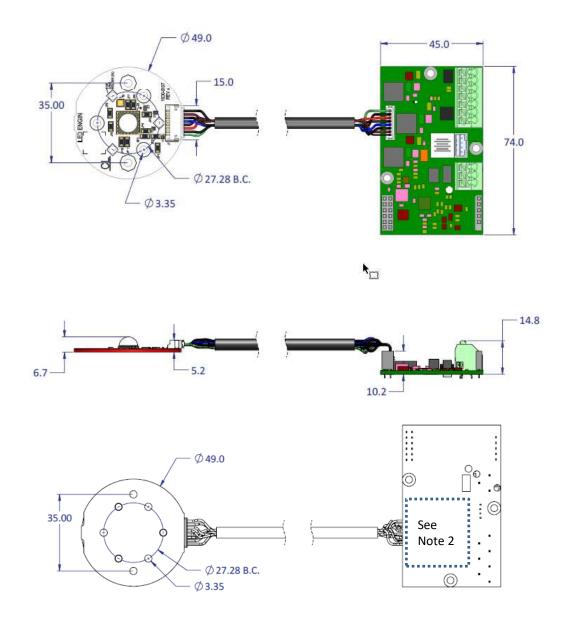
Mechanical dimensions of LuxiTune light engine – without secondary lens
